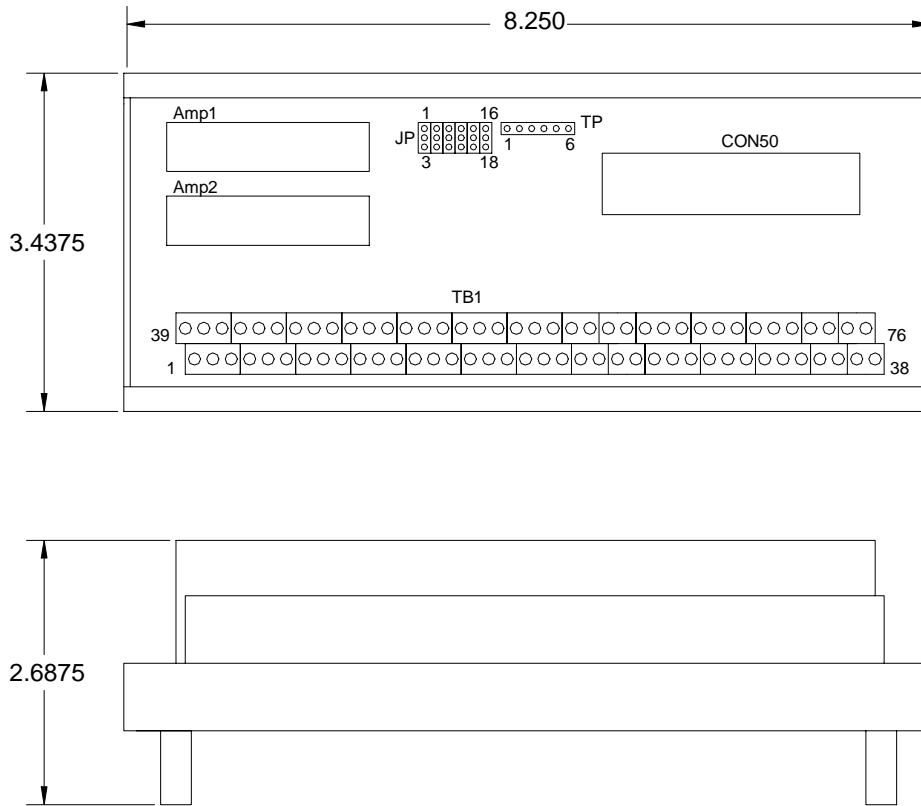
Servo Breakout Module Dimensions (P/N 6000-04)
